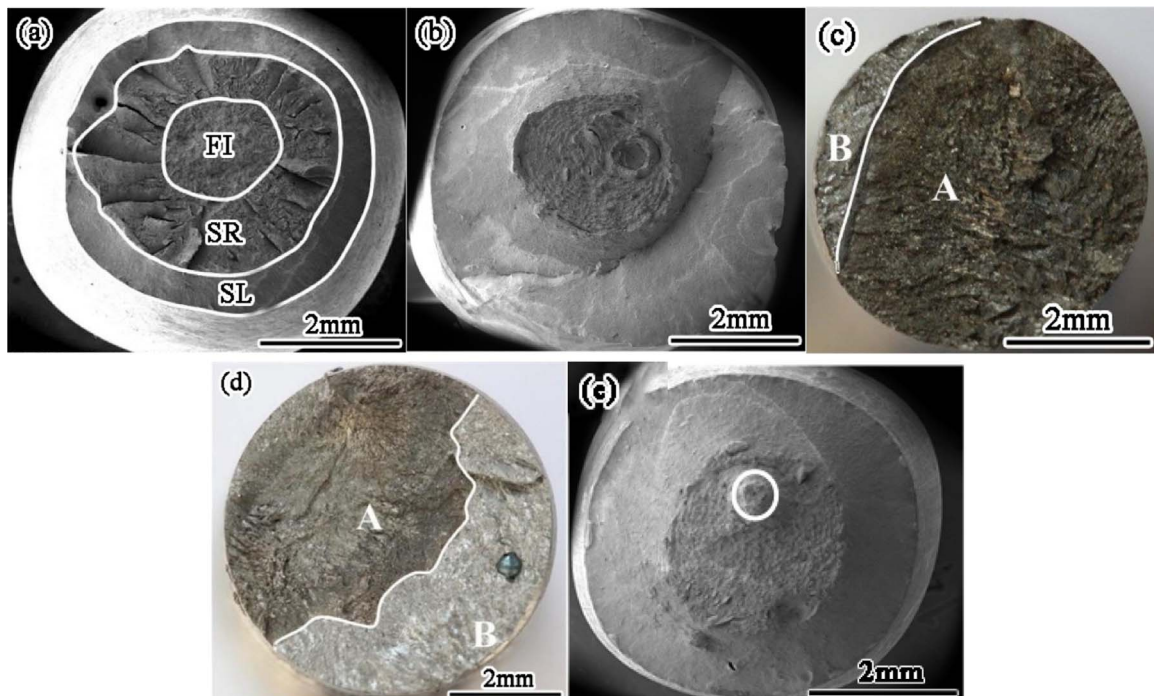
Macro-fracture surfaces of four tensile specimens at various testing temperature (a) for 1# specimen at -50°C , (b) for 2# specimen at -50°C , (c) for 3# specimen at -50°C , (d) for 3# specimen at -196°C (e) for 4# specimen at -50°C .
